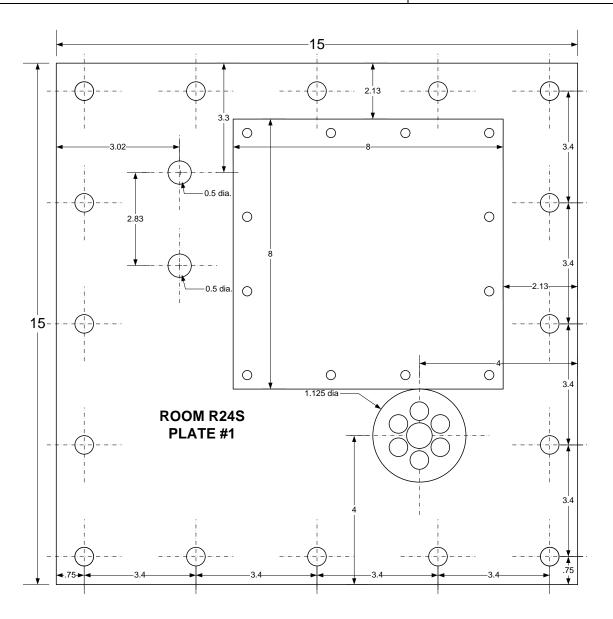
Room 24S (Test Room) Inner Mounting Plate Dimensions Plate #1
